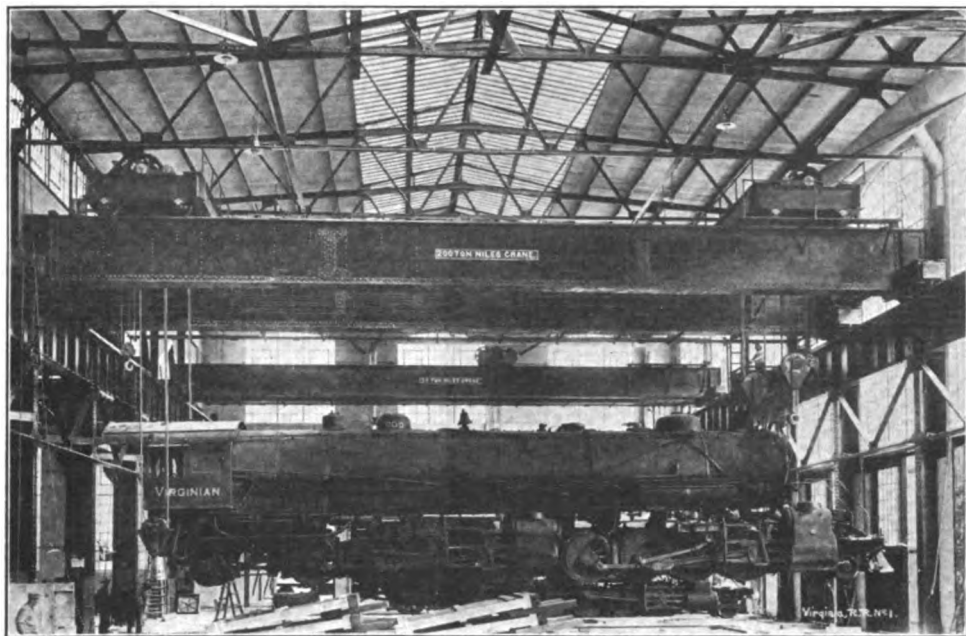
Showing Cranes Operated by Alternating Current Motors
